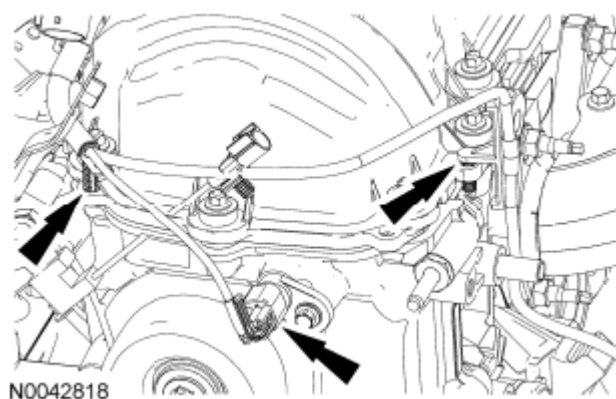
Locating CMP Sensor Electrical Connector And Wiring Harness Retainers (LH)
